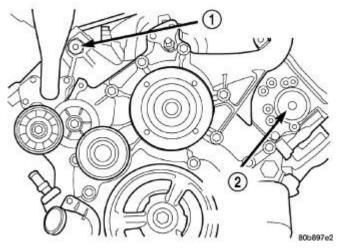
Cylinder Head Access Plugs Courtesy of CHRYSLER LLC
